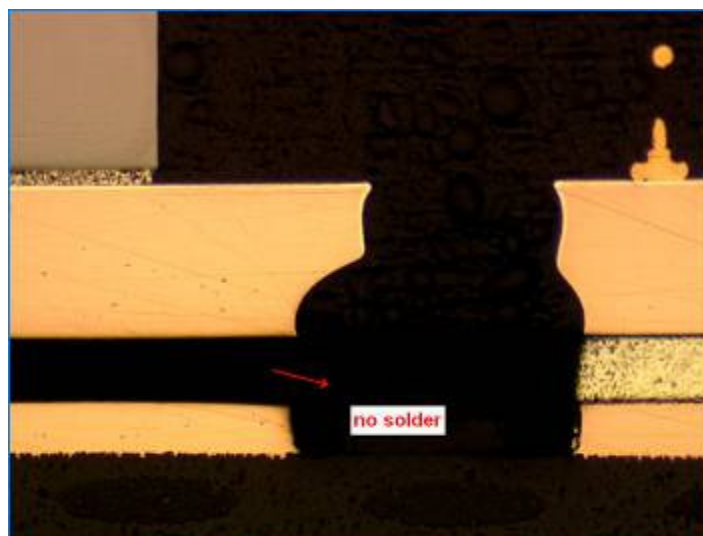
cross section, SN61, U28, middle right side, no solder 100x
